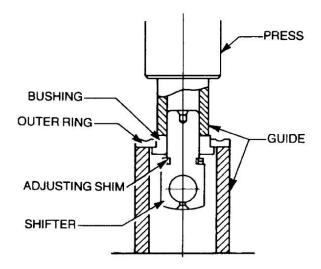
Removing the Bearing Race from the Shifter - Sectional View
